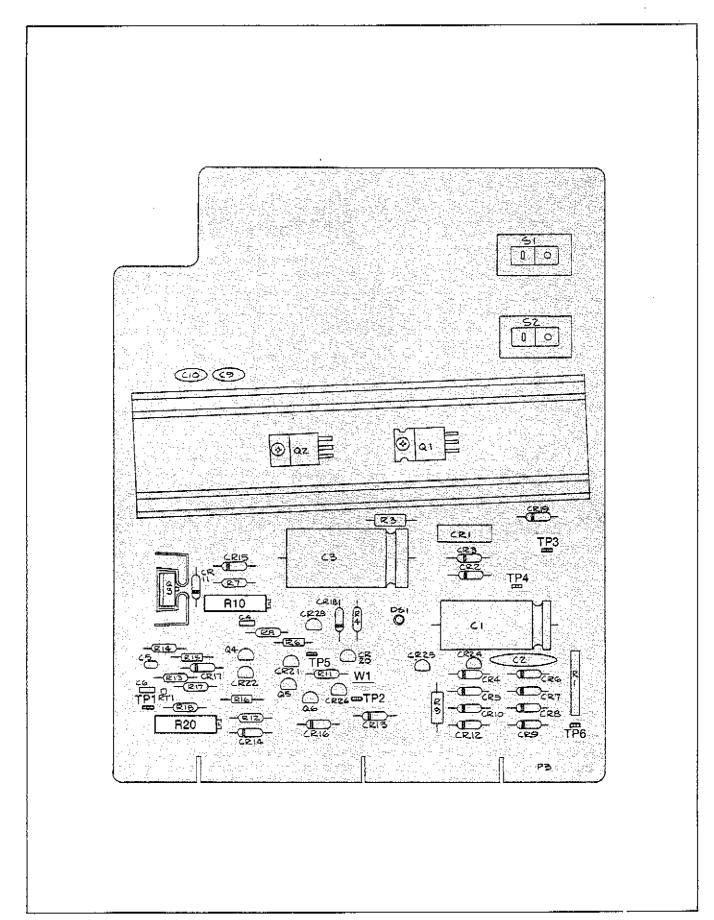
Battery Charger Test Points and Adjustments on A3 Pre-Regulator PCB Assembly
